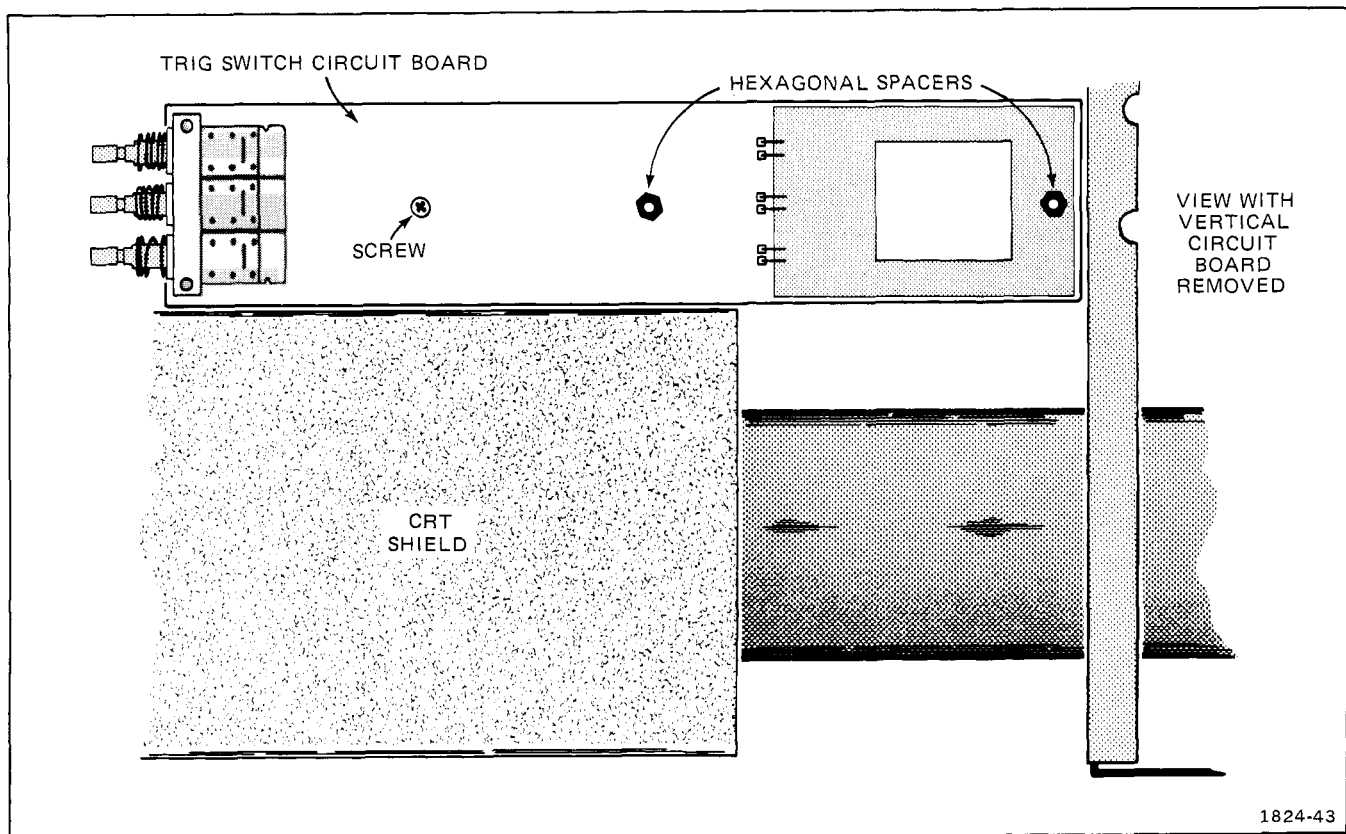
Location of screw and spacers holding Trigger circuit board.
